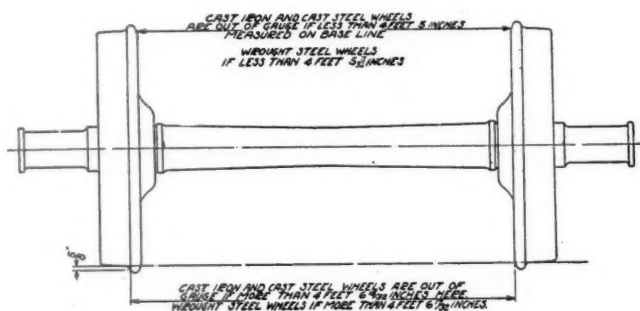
Proposed revision of Fig. 9, page 122, Interchange Rules, showing the mounting dimension limits
